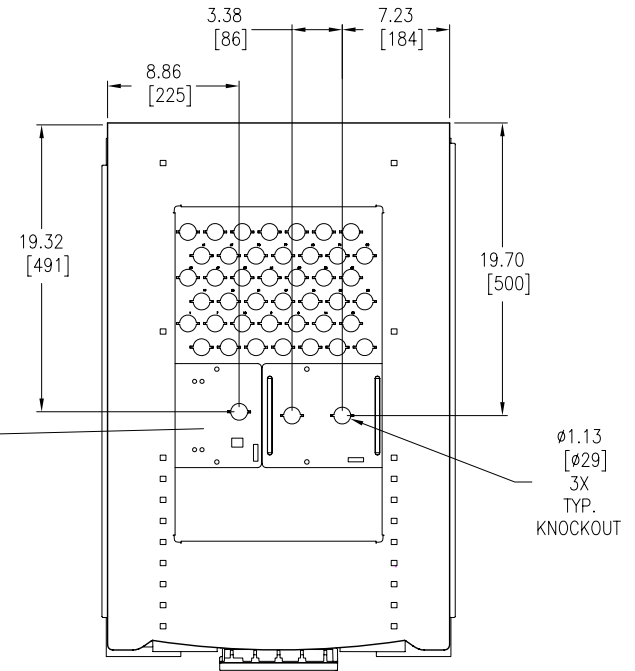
PLATE USER INTERFACE PCBMTG. BOTTOM VIEW
